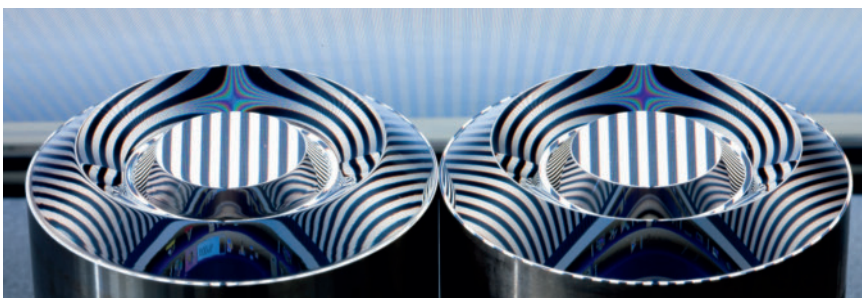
With the test mold, the parts can be produced by injection molding and injection-compression molding; injection-compression can be performed either via the machine or via hydraulically operated cores
